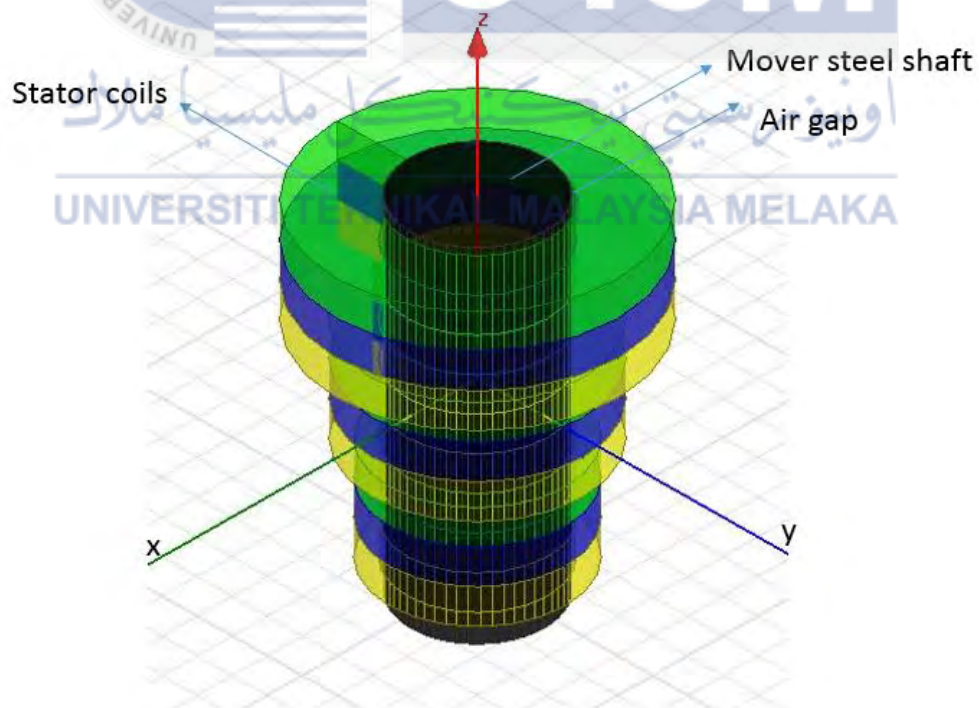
3D view of the Tubular Linear Reluctance Actuator with step windings
